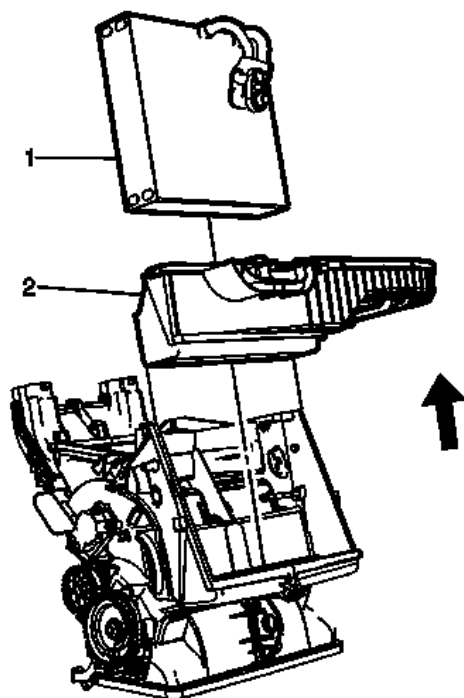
Heater & Air Conditioning Evaporator & Blower Upper Case
